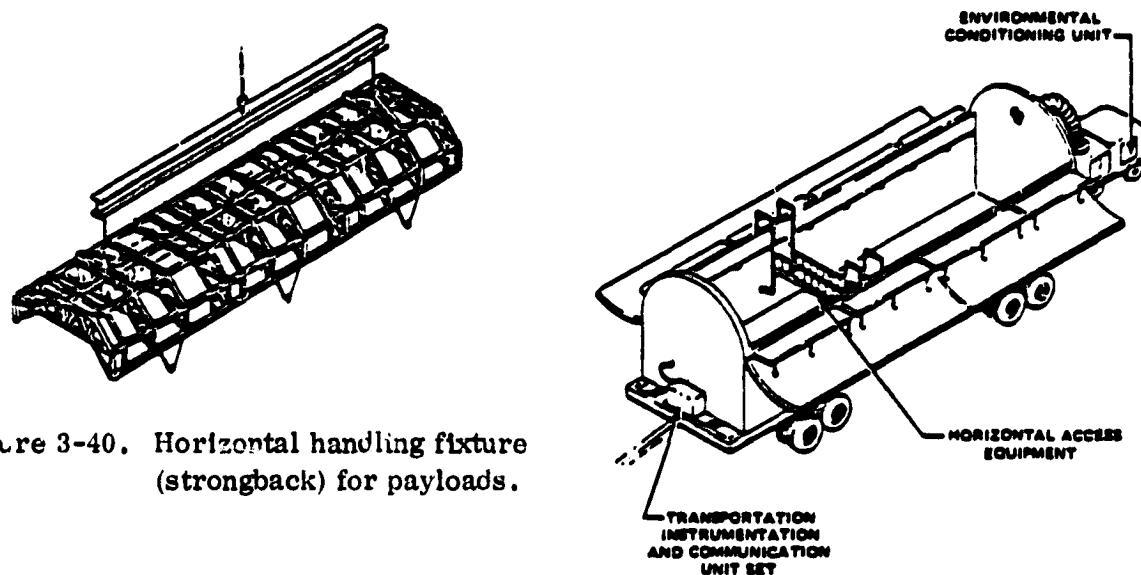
Horizontal handling fixture (strongback) for payloads.
